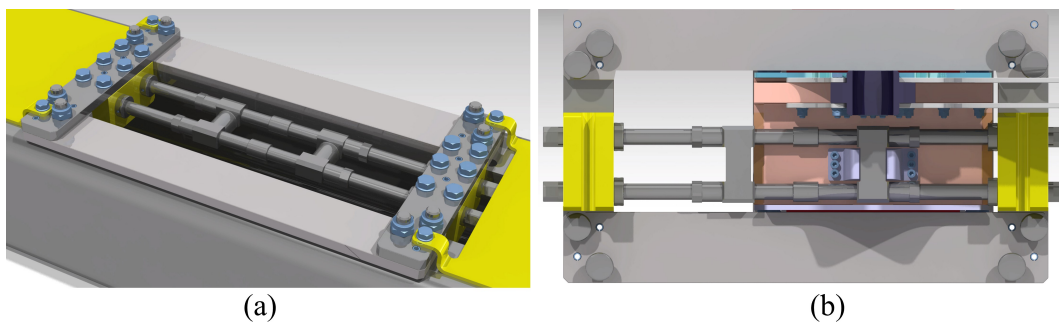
(a) Lower locking blocks (above view), (b) Locking interface (below).
